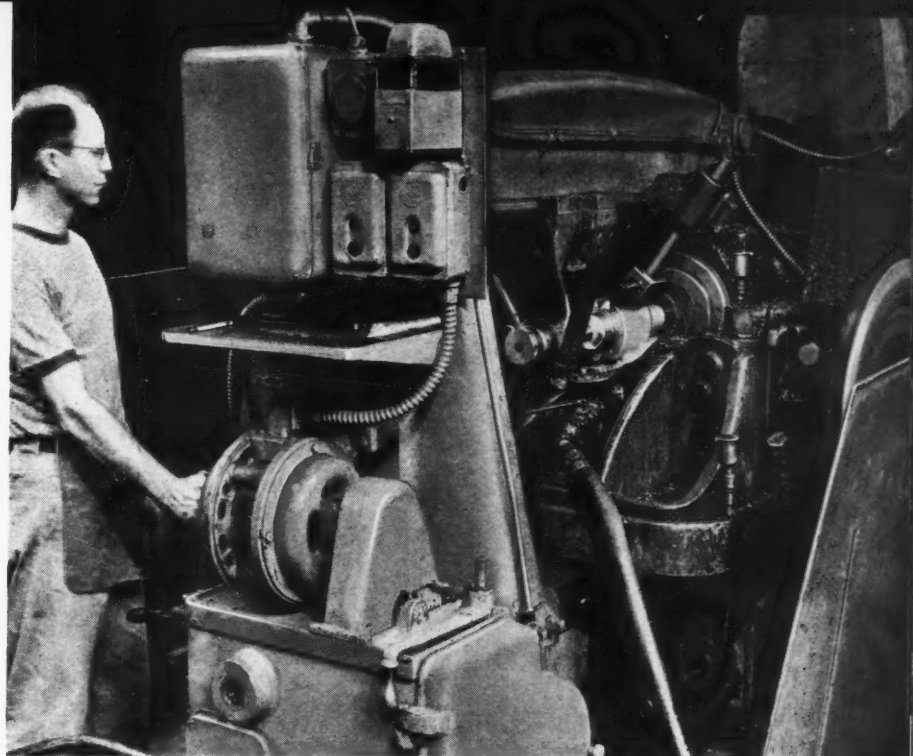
The pinions that engage with the drive gears are formed, turned, and faced in Foy automatic lathes, using cemented-carbide tools
